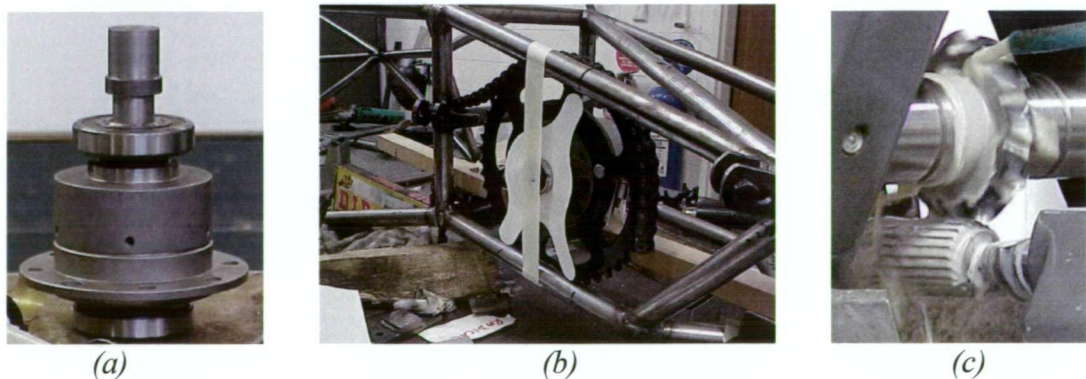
Differential, (a) with bearings fitted, (b) mounting position & (c) spline milling
